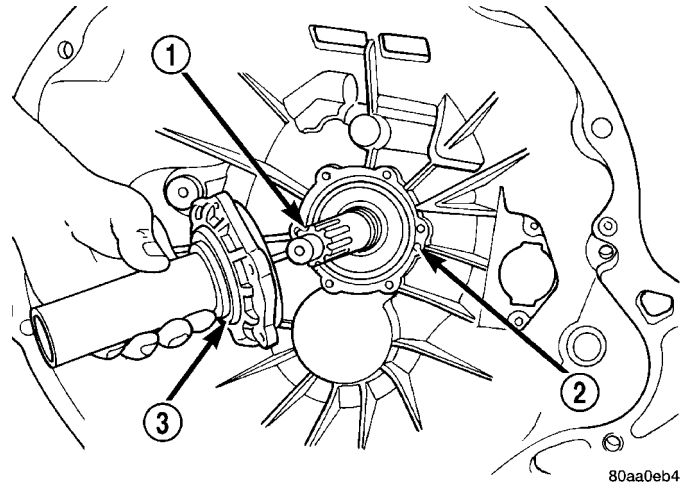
SEAL BEARING RETAINER - TYPICAL
